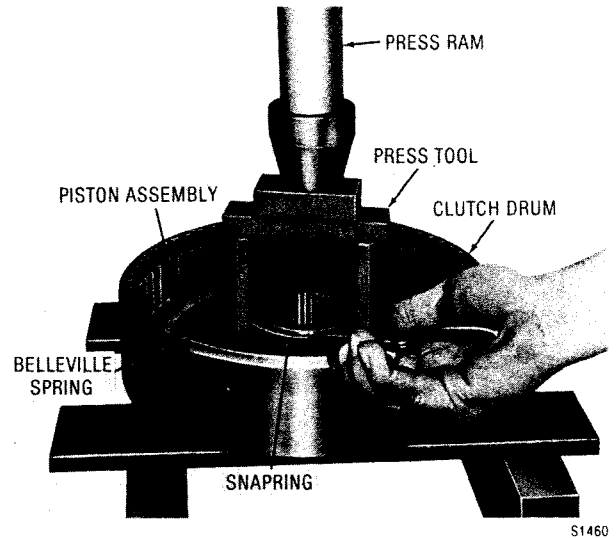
Removing (or installing) piston return spring (typical configuration)
